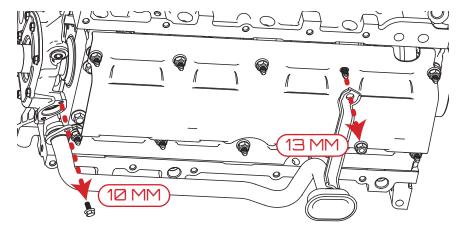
Removing the Factory Oil Pickup Tube (Screen)
